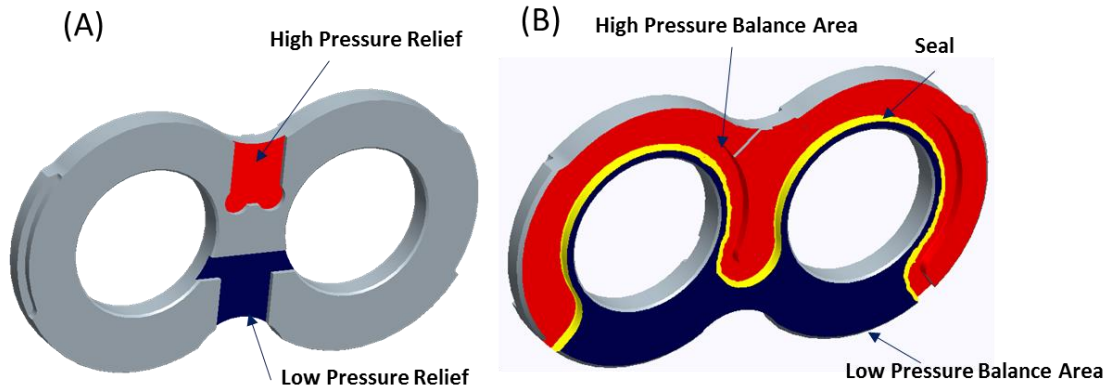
(A) Side of the lateral bushing facing the gears (B) Side of the lateral bushing facing away from the gears.
